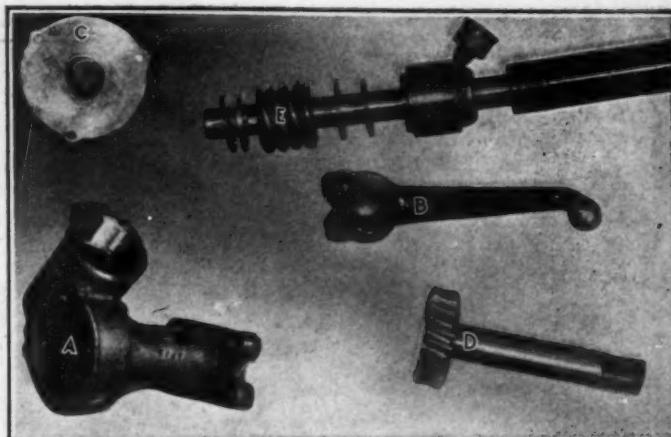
Steering details: A, box; B, drop arm; C, cover; D, sector; E, shaft and worm
